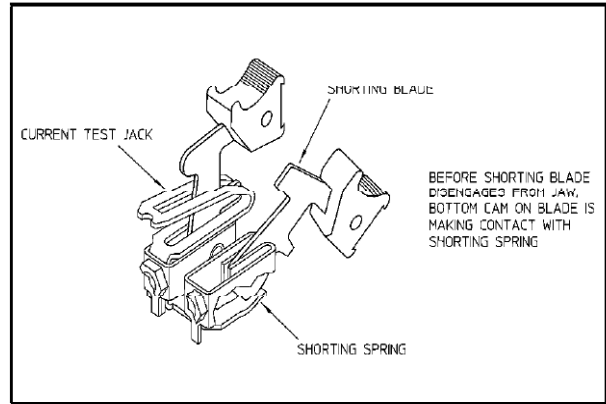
Blade assembly of 2 position pole "C-C" (rear view outside of base)
